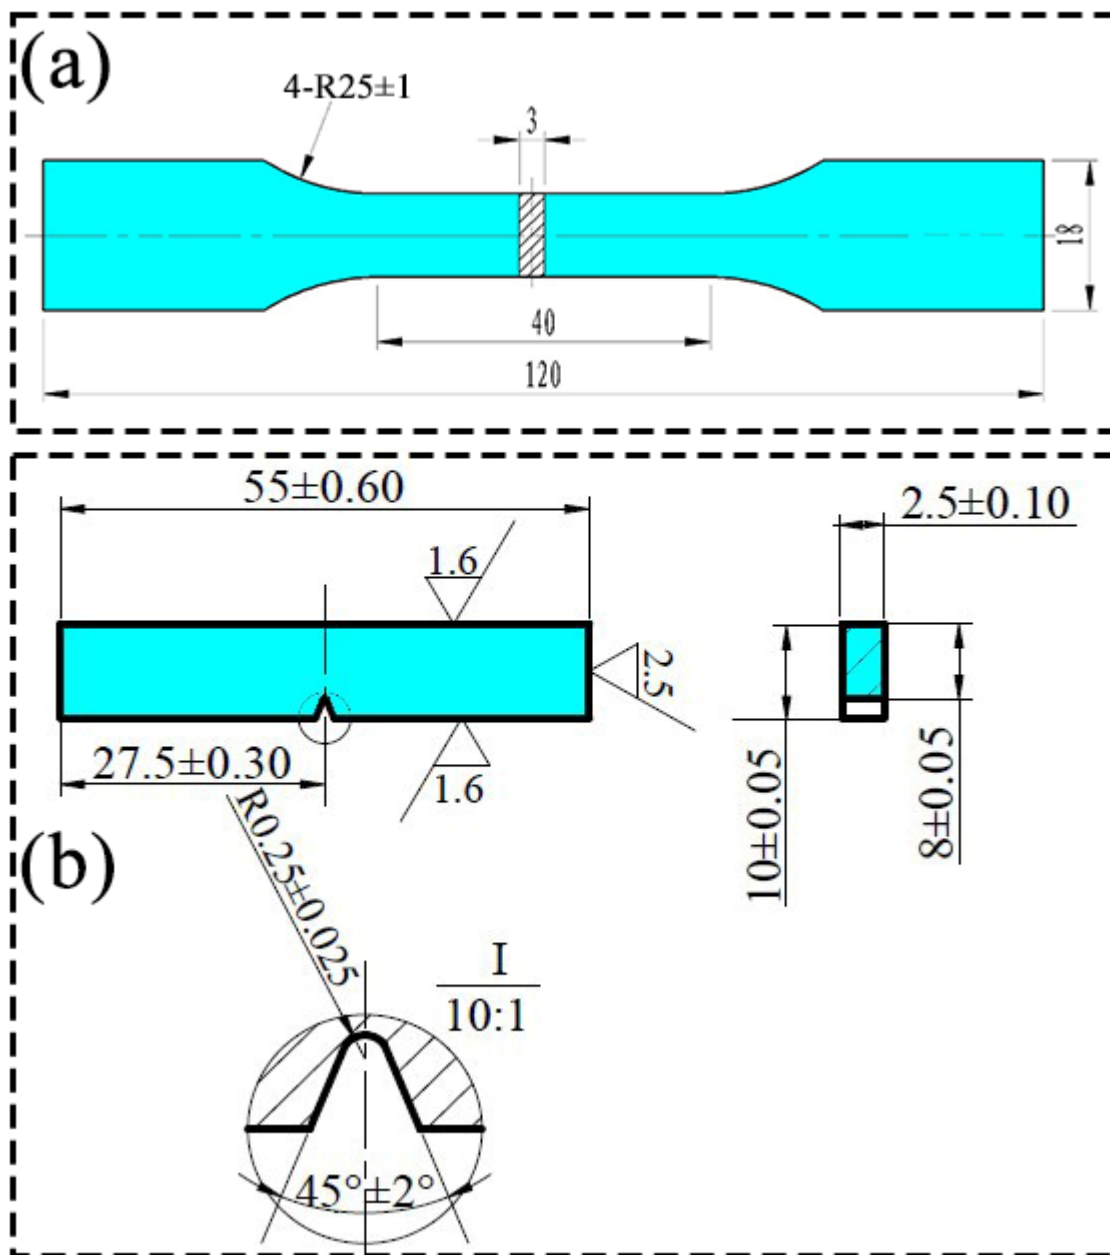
Schematic of tensile and impact specimen: (a) tensile specimen; (b) impact specimen.
